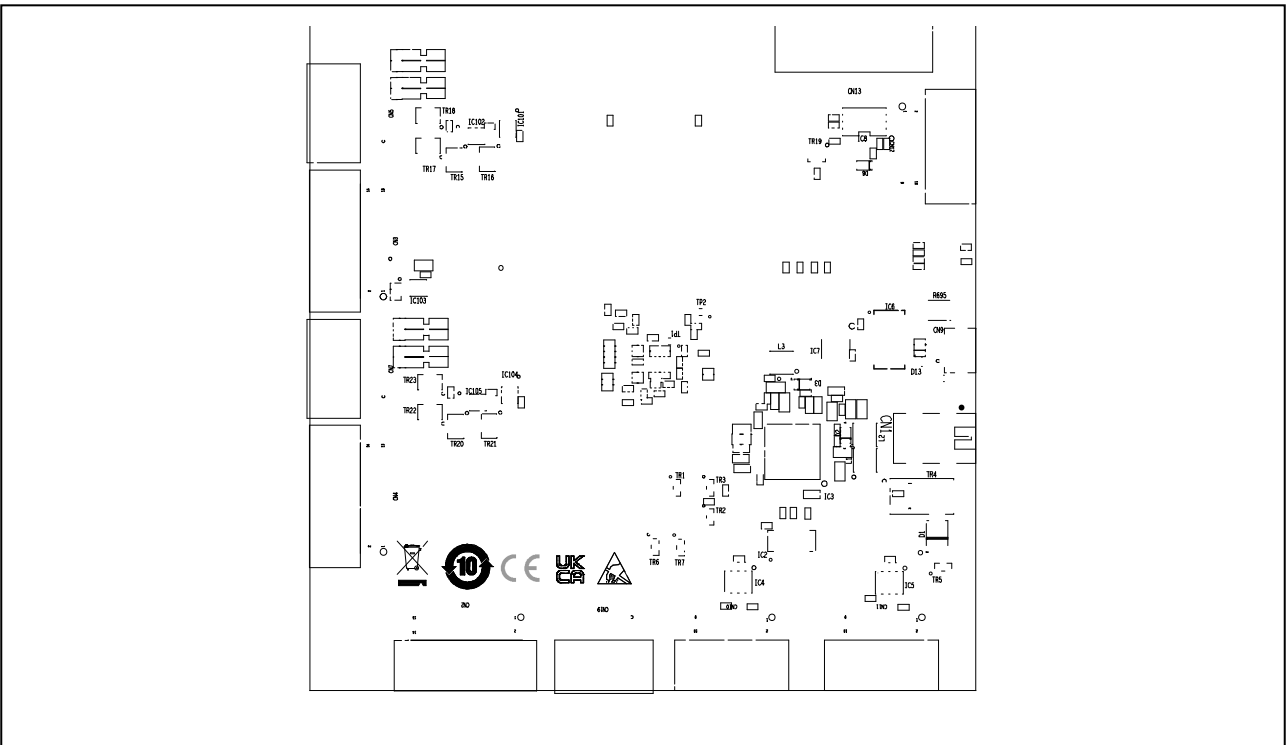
Placement of connectors on the bottom side on board revision D017988\_06\_V02
